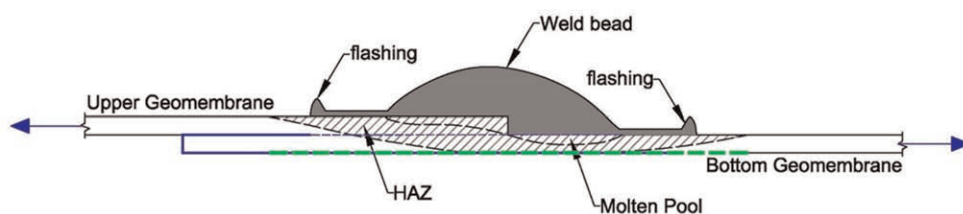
Cross-section of typical HDPE extrusion weld.
